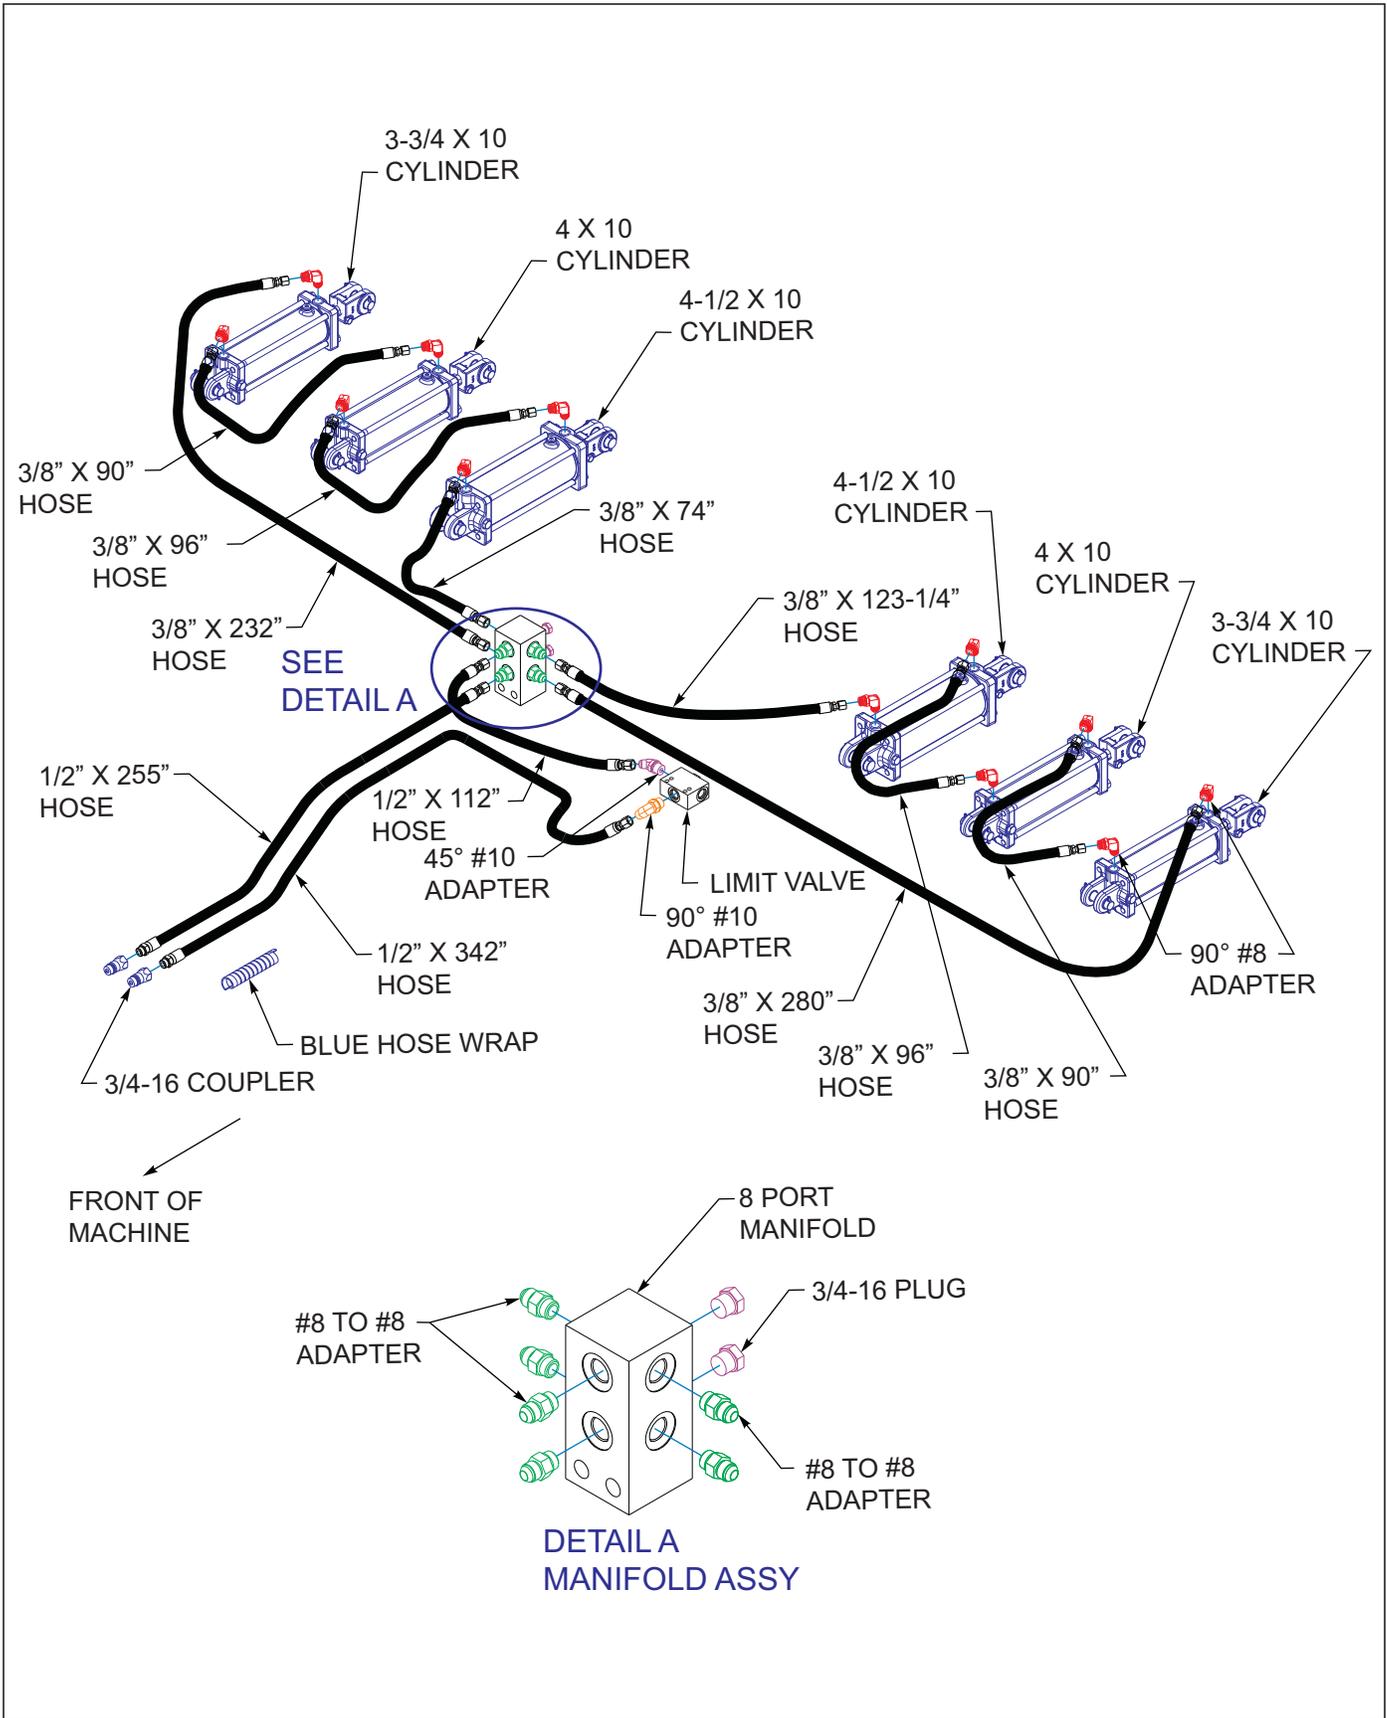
Lift Hydraulic Placement LH 1760-35'
